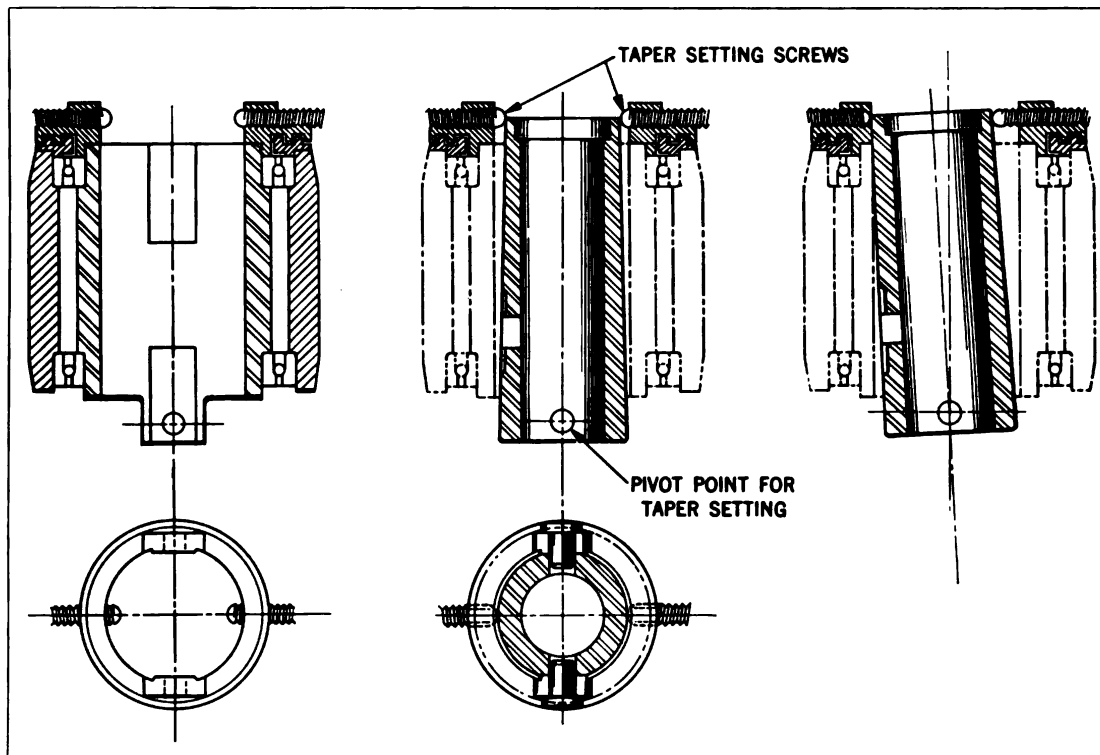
Main spindle assembly (left), inclinable guide sleeve set for straight grinding (center), and set for taper grinding (right).
